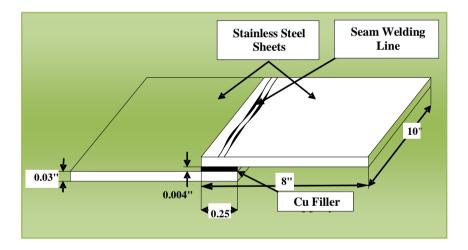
Standard Seam Welding Joints with Copper Filler Metal.
